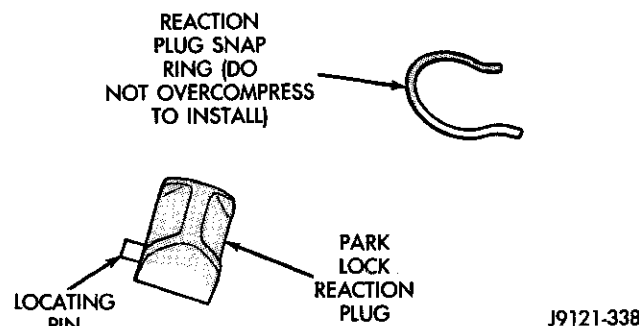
Reaction Plug Locating Pin And Snap-Ring
